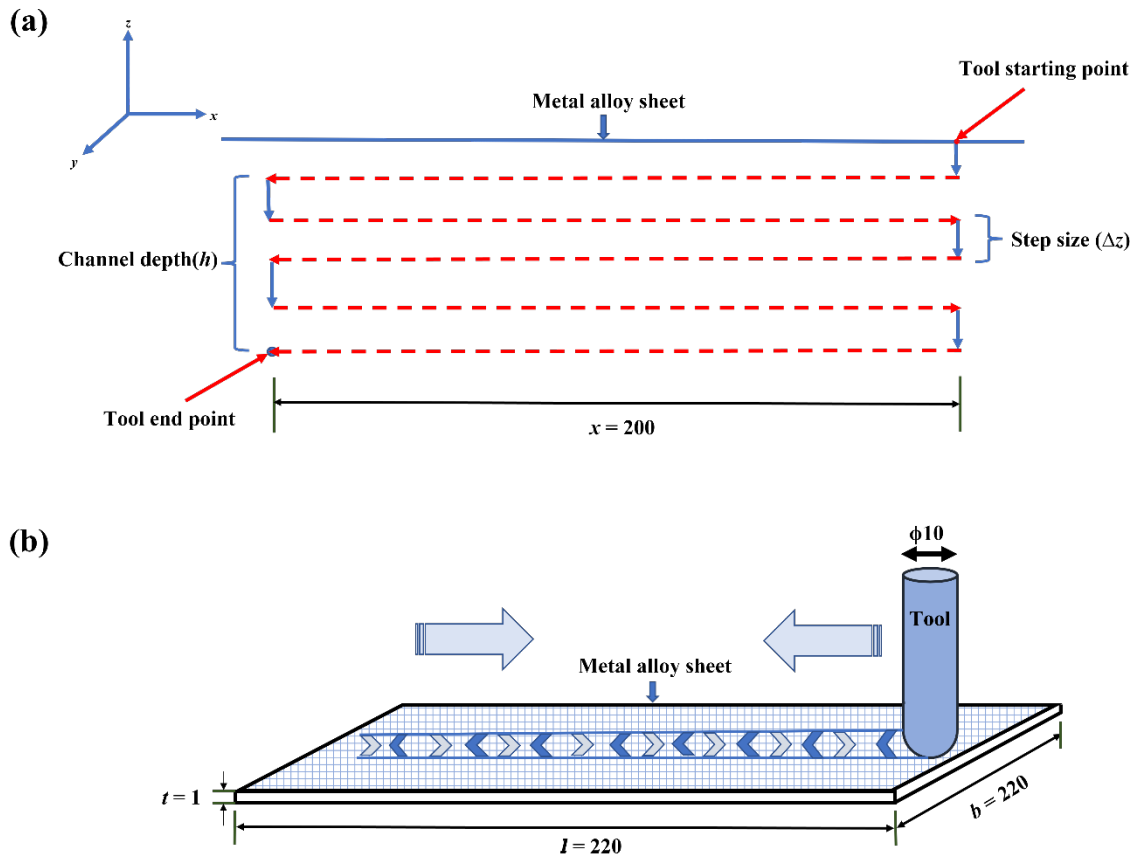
Forming of U-channel: (a) tool path, (b) total imparted depth $h = 5$ mm with step size $\Delta z = 1$ mm. (All dimensions shown in the figure are in mm).
